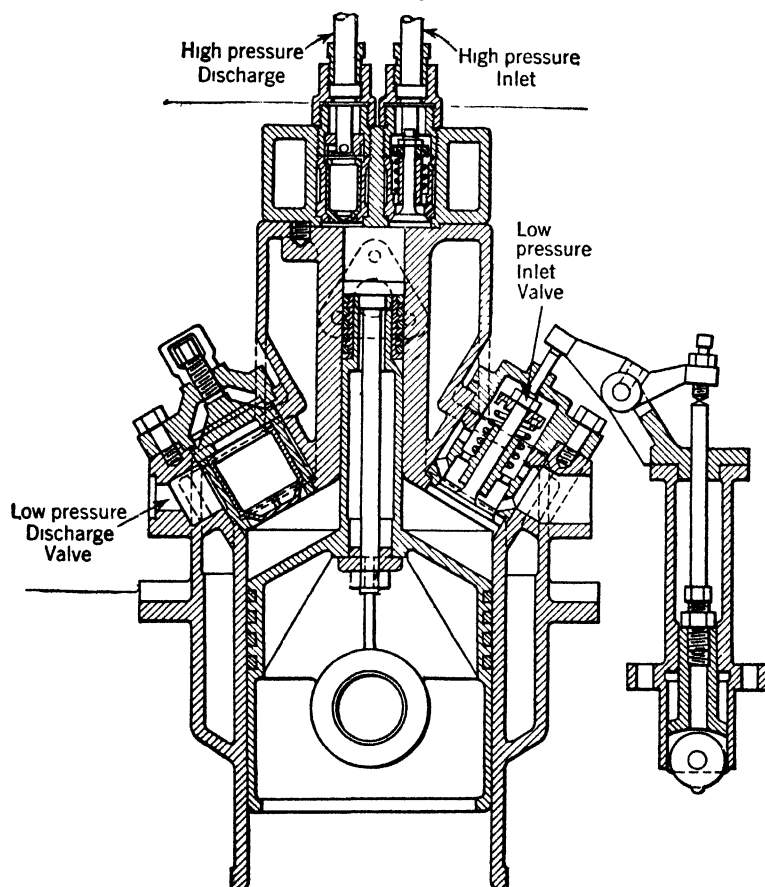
Section Through Craig Two-Stage Air Compressor
